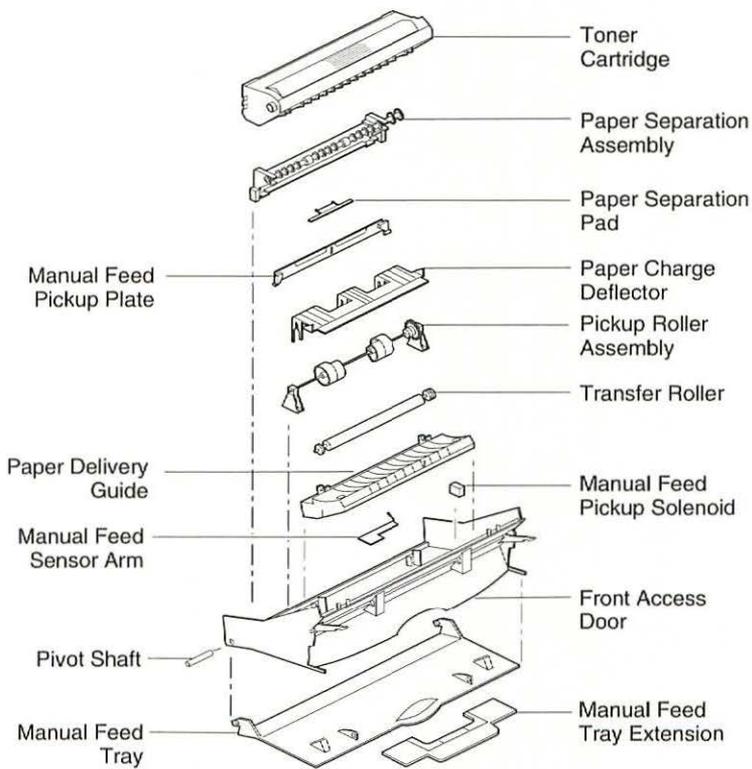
LaserWriter Select 360 Exploded View (2 of 2)
